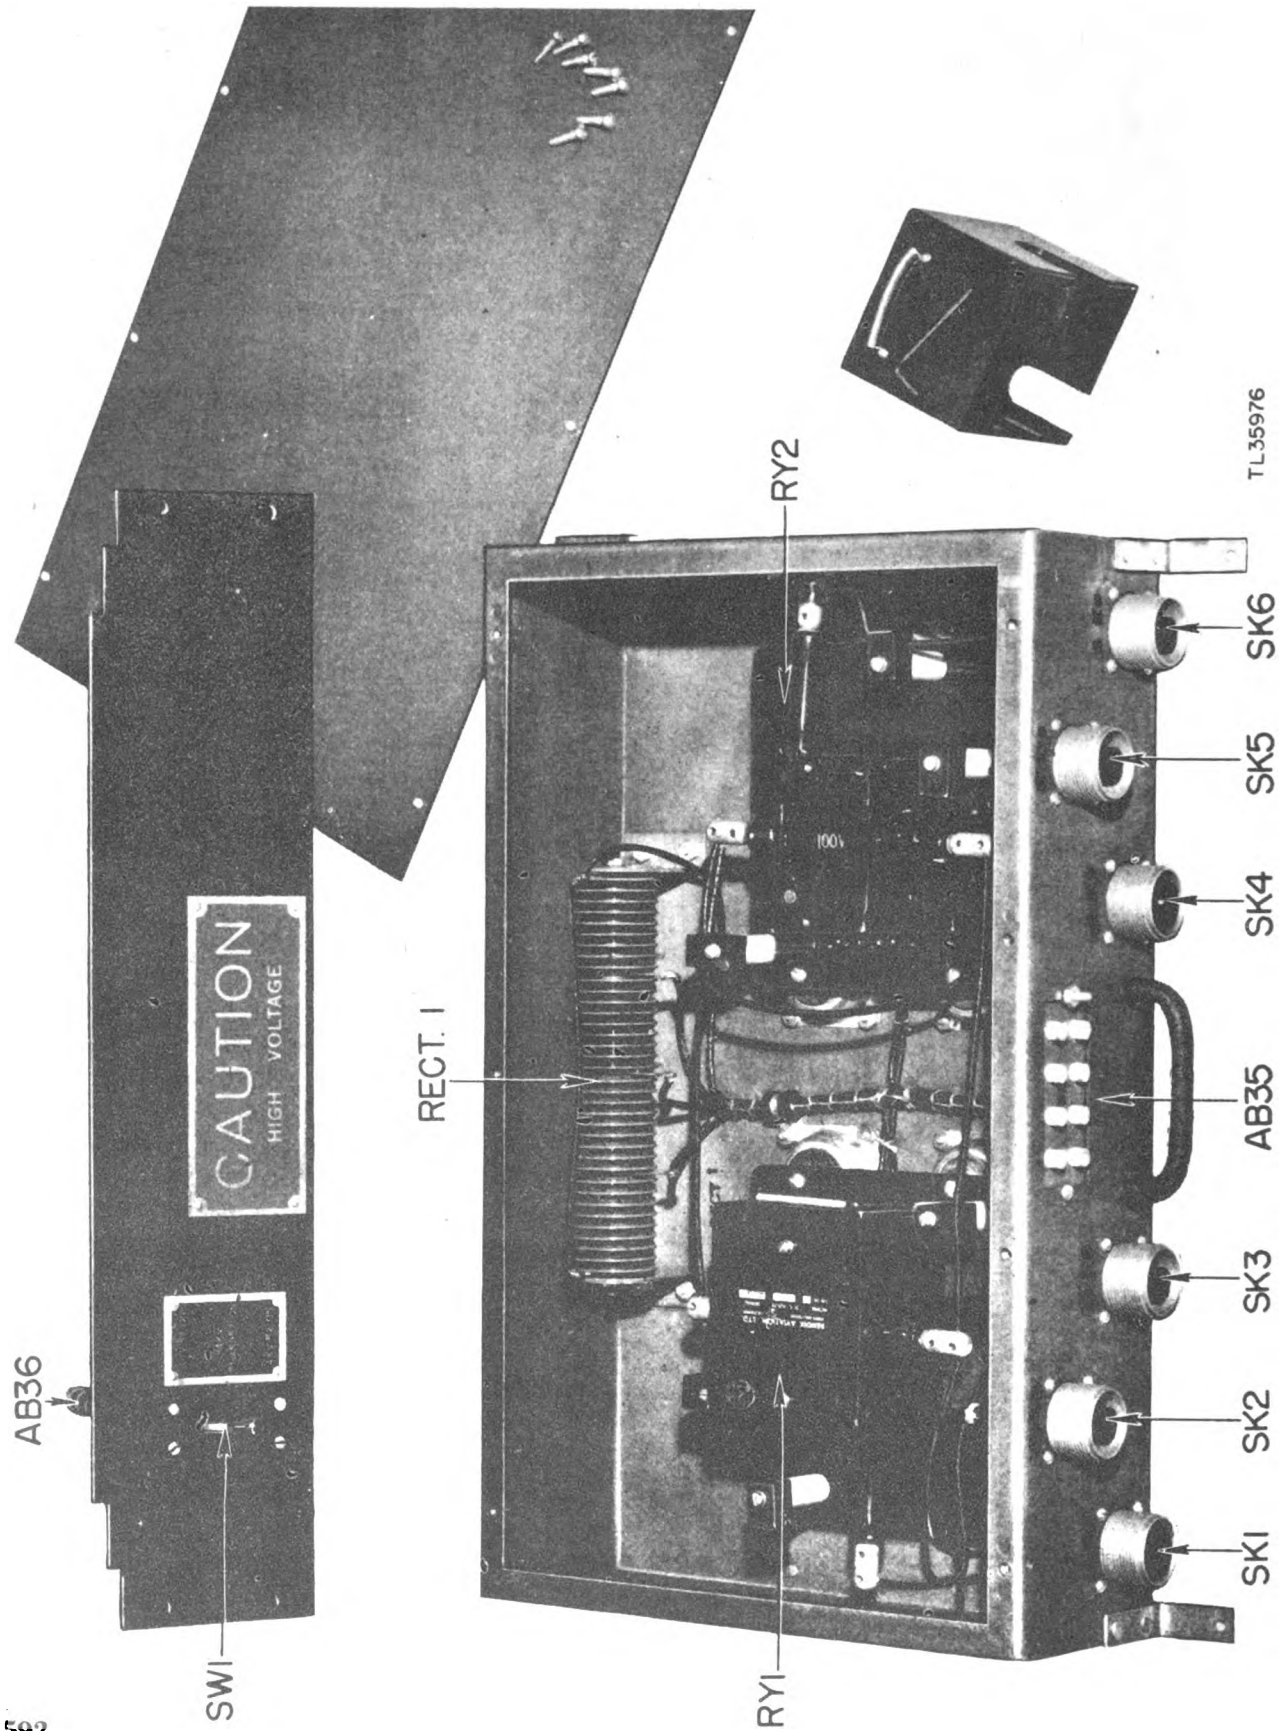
Relay Assembly RE-3/MPN-1, top view and control panel.
